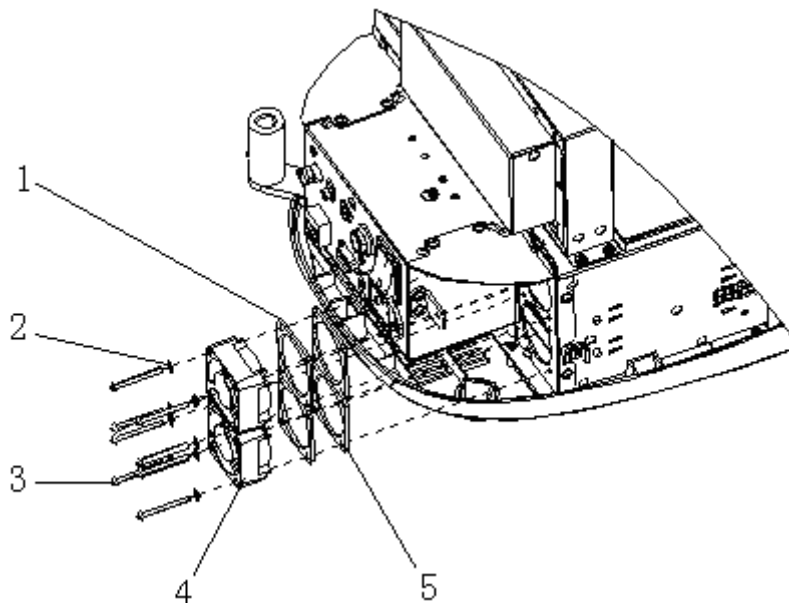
Sketch Map of Fan on Back Board Disassembly
